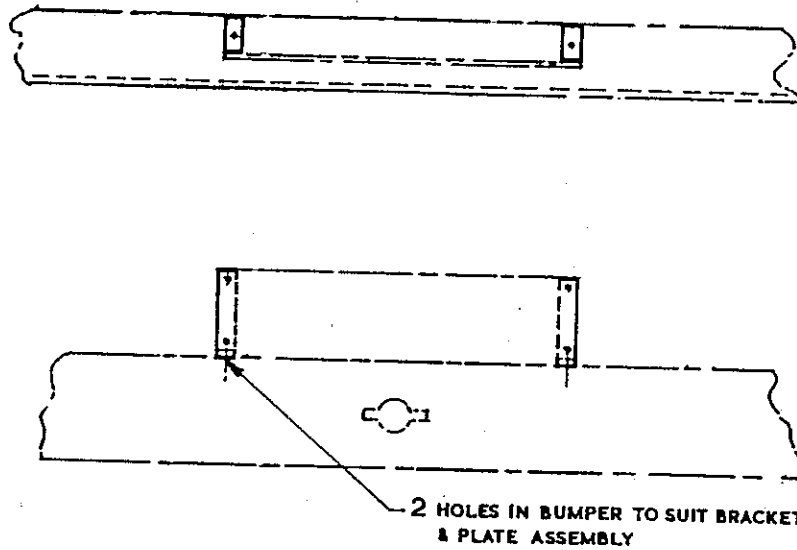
VIEW OF BUMPER BAR FROM FRONT
